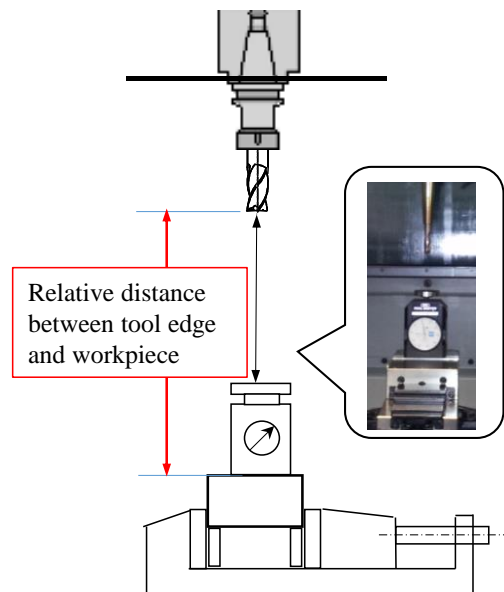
Method of measuring the relative distance between the cutting edge of the tool and the workpiece by a contact measuring apparatus.
